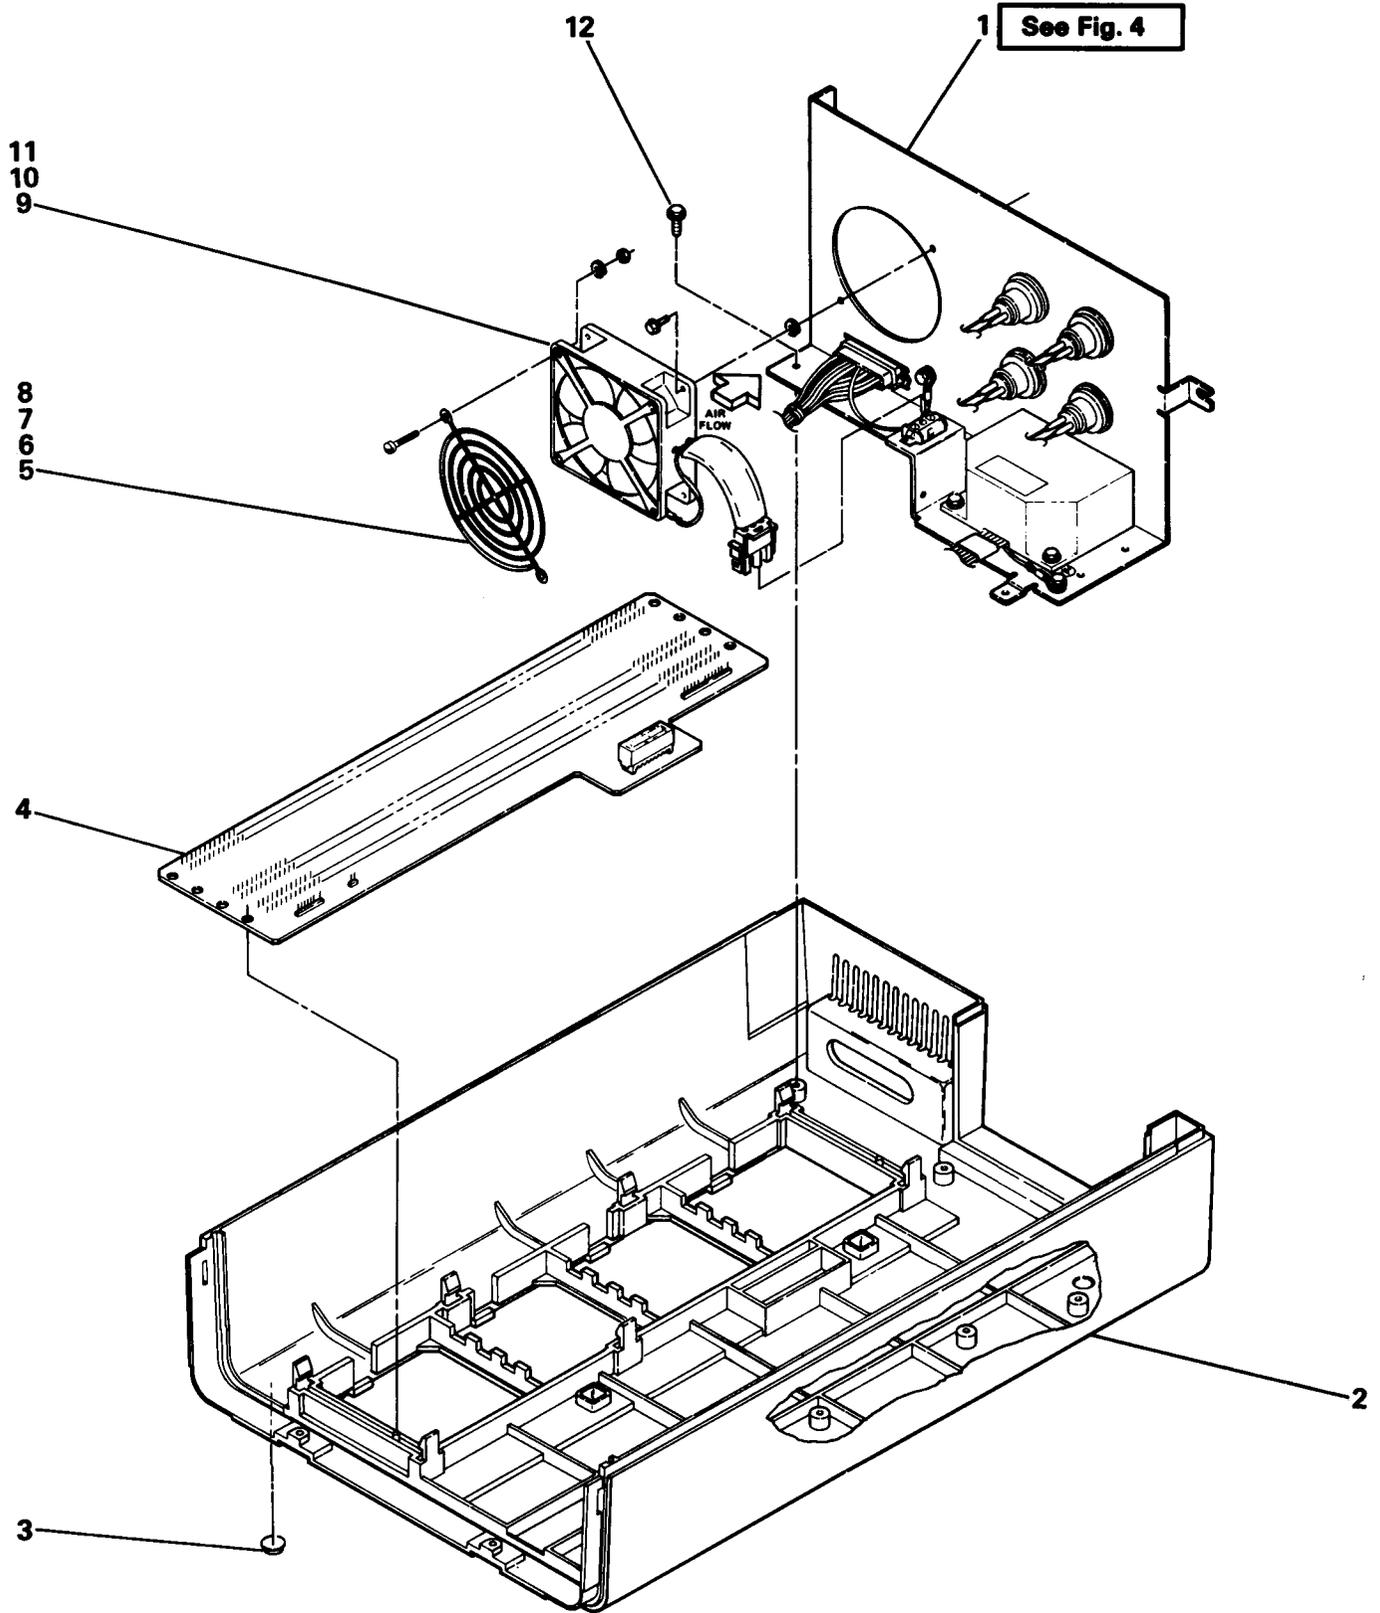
BASE ASSEMBLY. SEE LIST 3.
